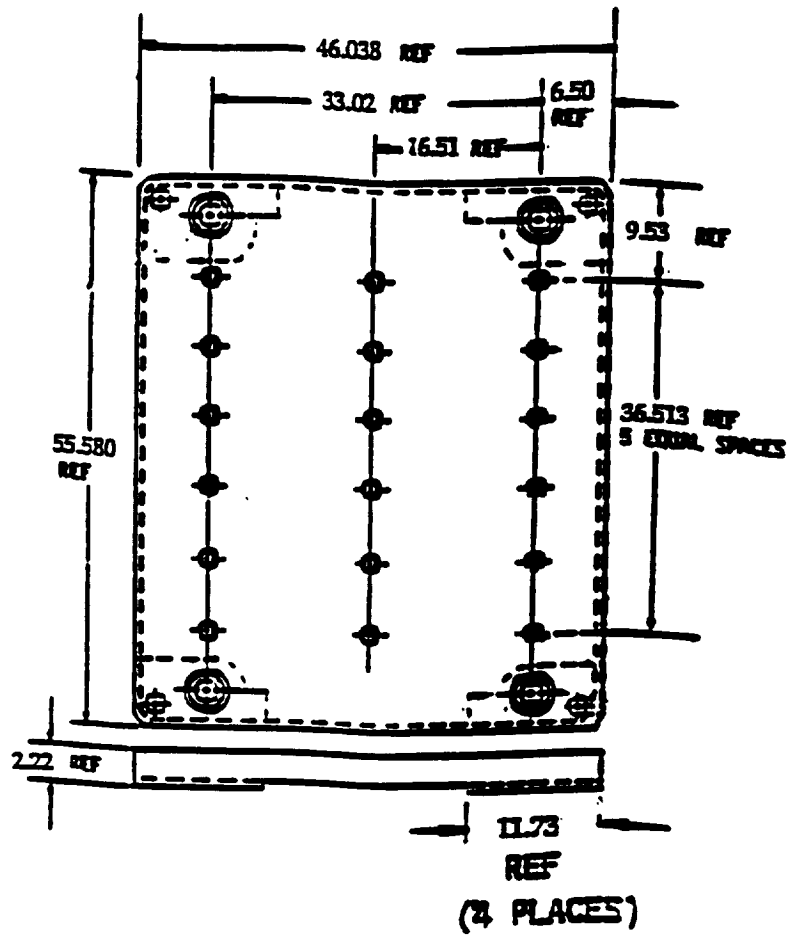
The double adapter plate [1]. All dimensions are in cm.
